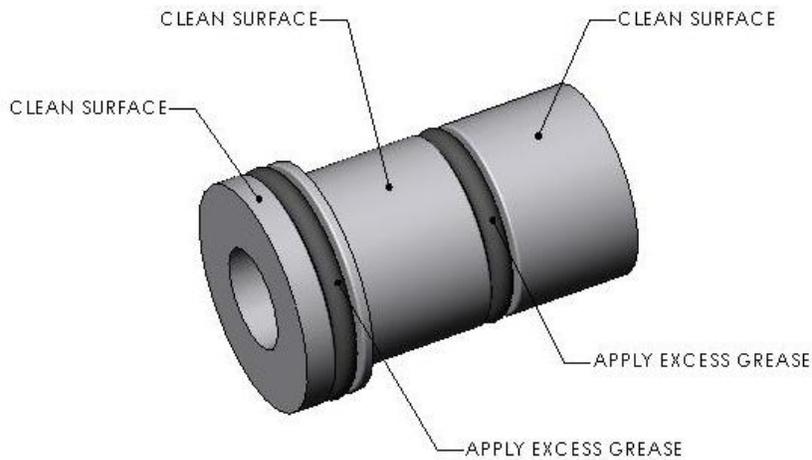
B – STEP 2 – Replace the two O-rings (ASDI PN 39012 and 39014). Apply excess lithium o-ring grease.
